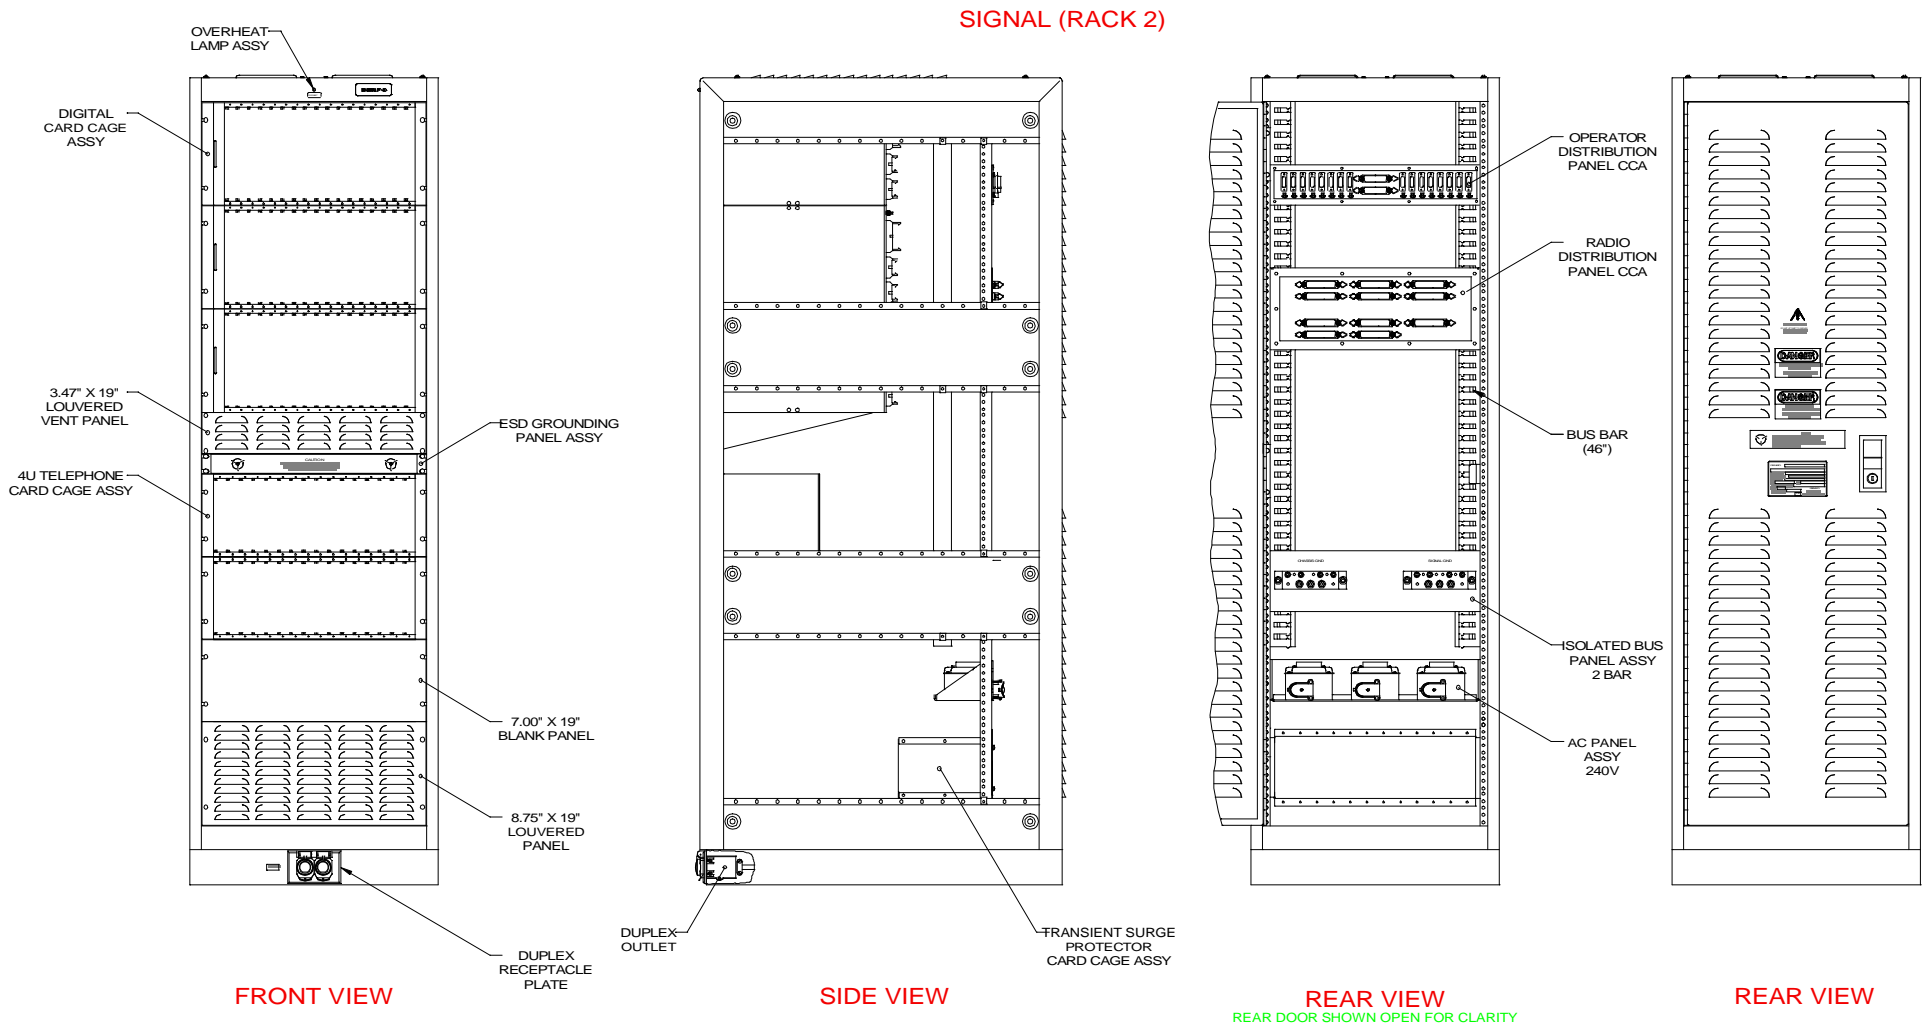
Basic ETVS System 2 (BS-2); Racks 1-3; Front, Side, and Rear Views (Sheet 2 of 3)
